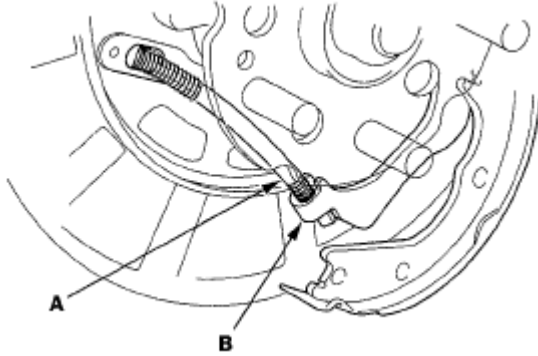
Identifying Parking Brake Cable And Parking Brake Lever
